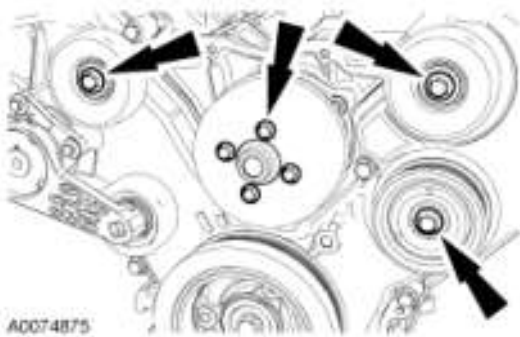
Locating Coolant Pump Pulley And Accessory Drive Belt Idler Pulley Bolts
